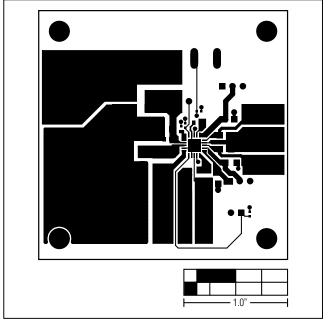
MAX16922 EV Kit PCB Layout—Component Side
